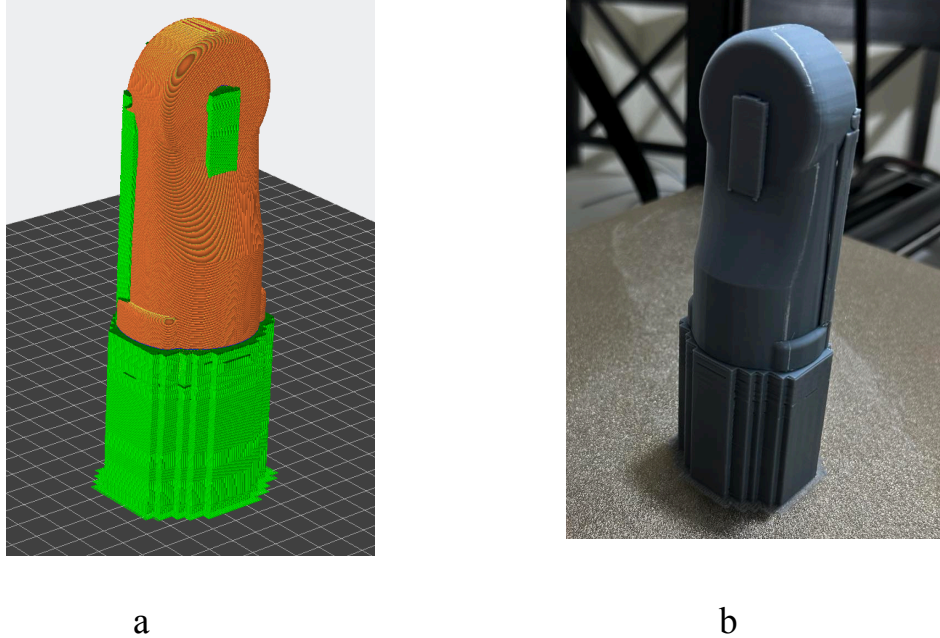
a. AnycubicSlicer 3D model of the connector holder; b. Printed connector holder
